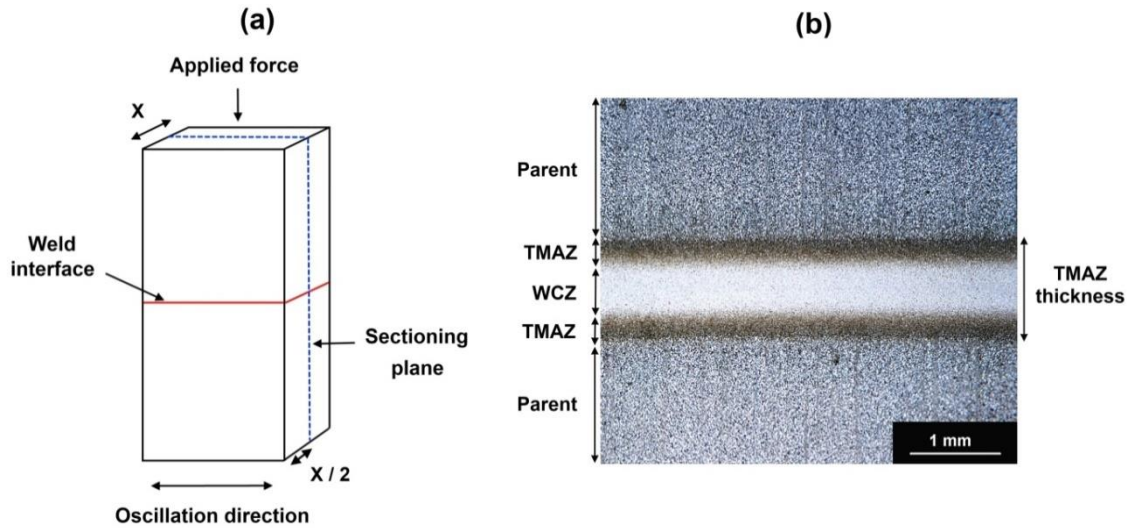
(a) Location of the sectioning plane where ‘x’ represents the out-of-plane dimension; and (b) a metallographic specimen showing the weld centre zone (WCZ), thermo-mechanically affected zone (TMAZ), parent material (Parent) and the TMAZ thickness.
